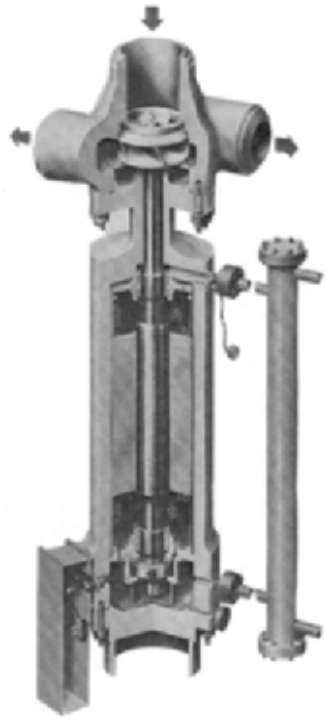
Boiler circulating pumps driven by a wet stator motor (Hayward Tyler)
